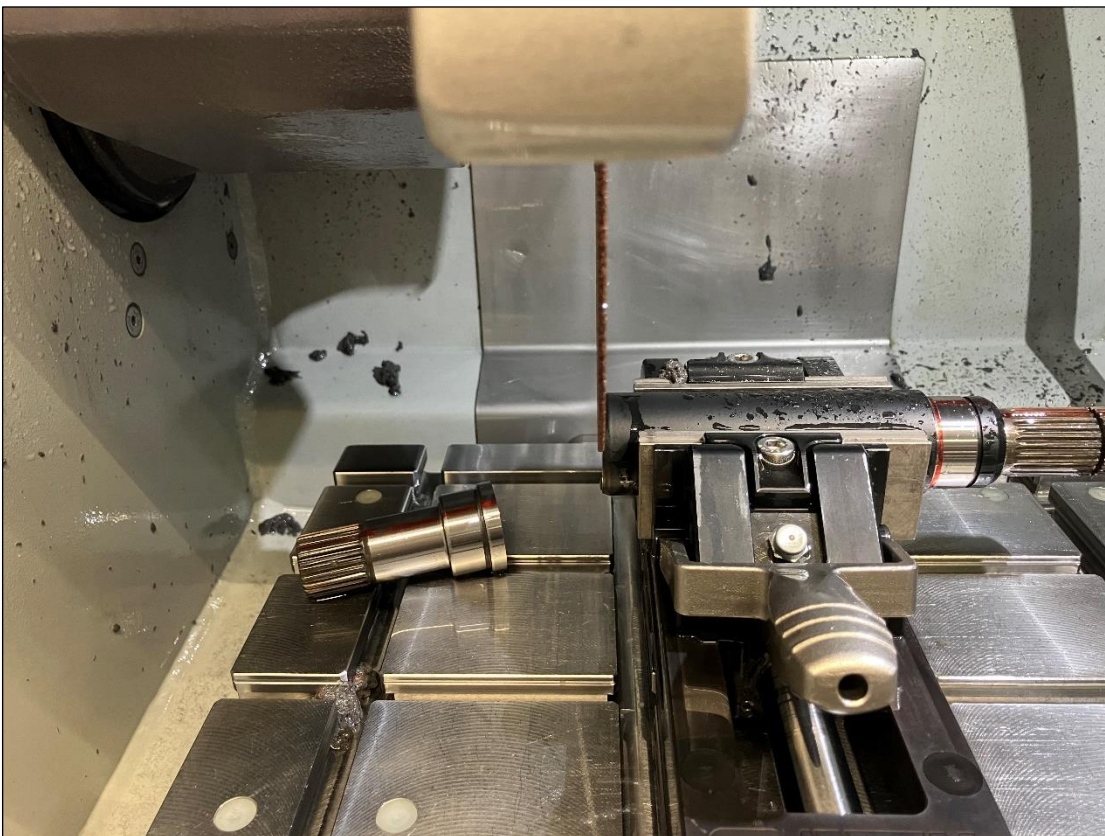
Cutting position 1 – AFTER cutting process (automatic vertical cut with Y-Axis).
